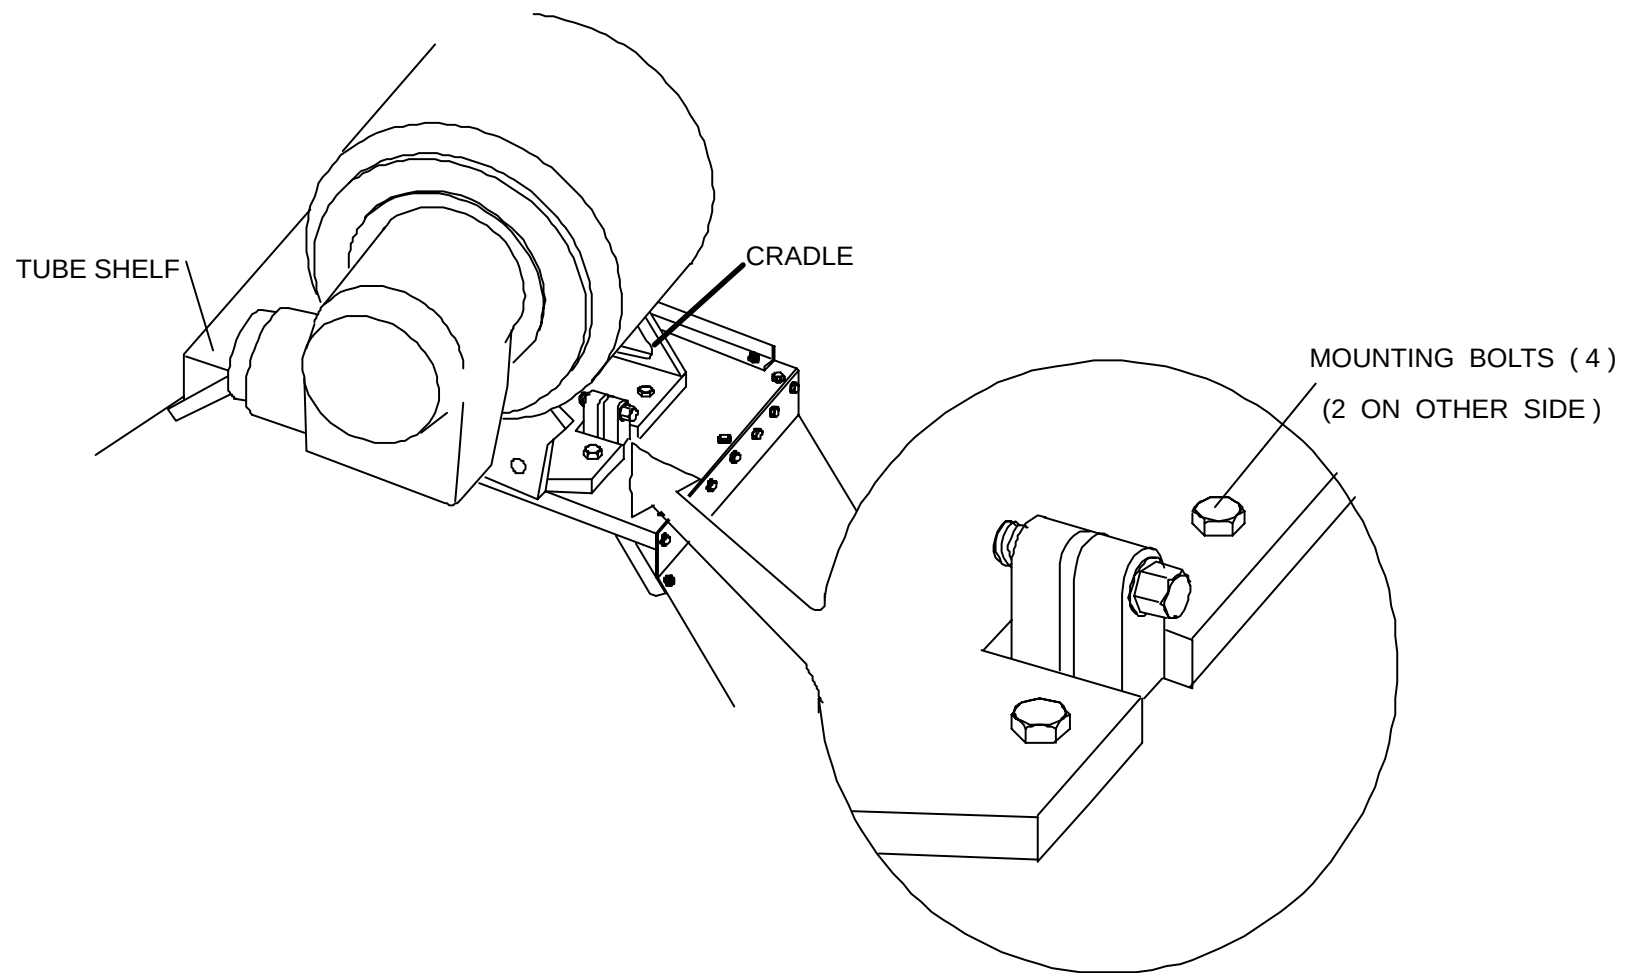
TYPICAL TUBE CRADLE ADJUSTMENT
